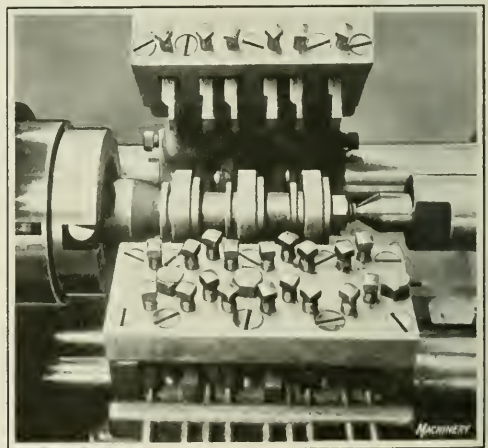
Machining Three Transmission Gears at One Time by mounting them on an Arbor
